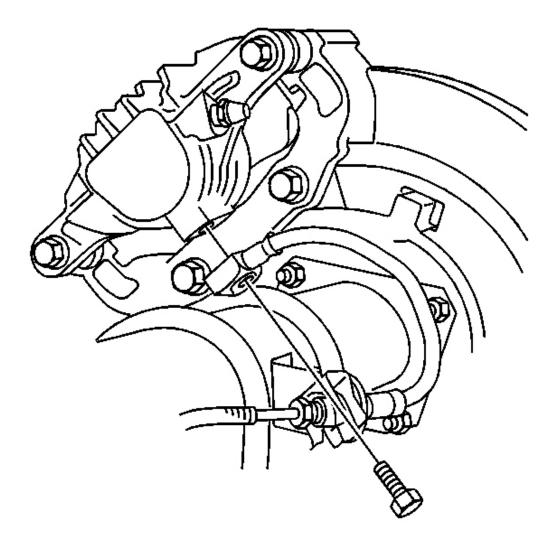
Upper Brake Caliper Mounting Bolt Courtesy of GENERAL MOTORS CORP.
